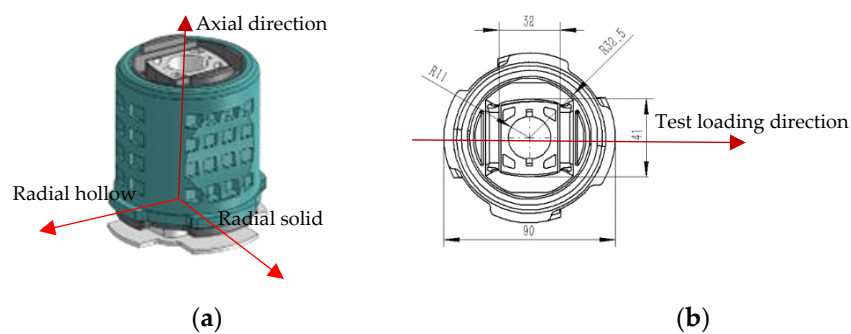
(a) Bushing CATIA model. (b) Bushing side view and top view of bushing.
